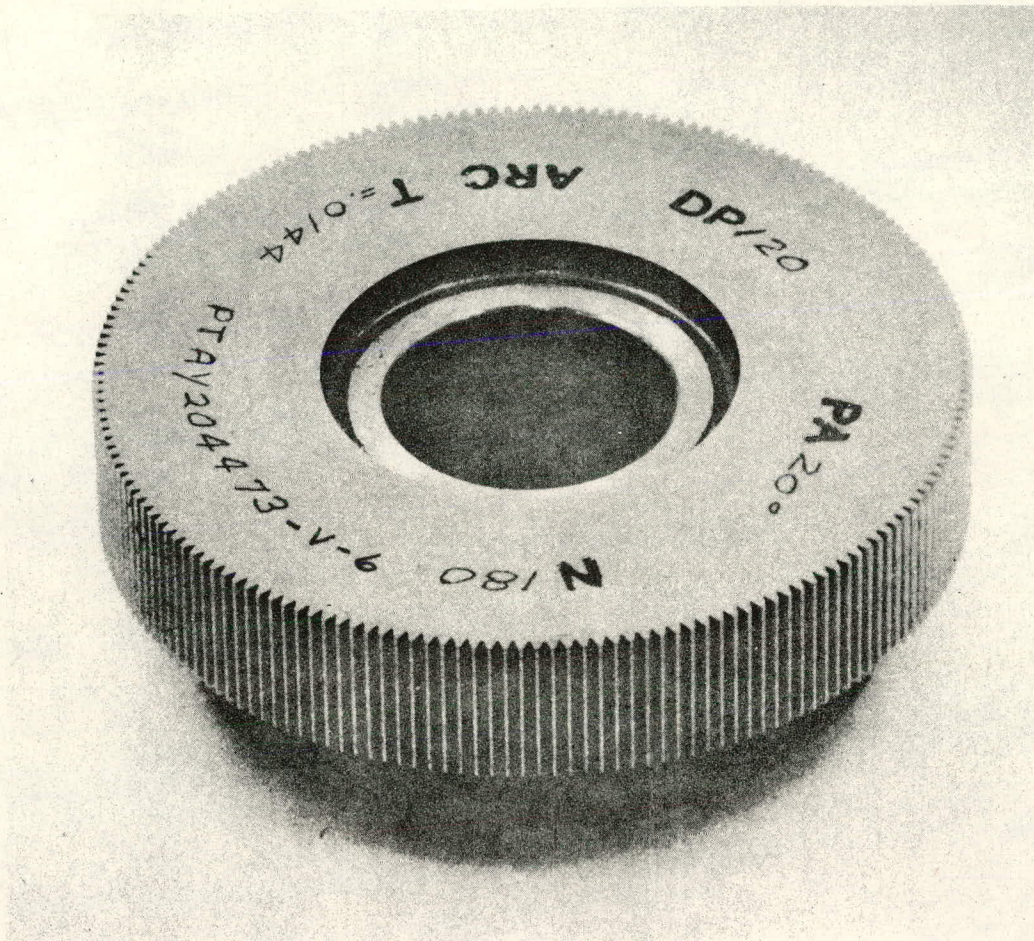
Master Gear and Staging Fixture for Redliner Gear Checker
